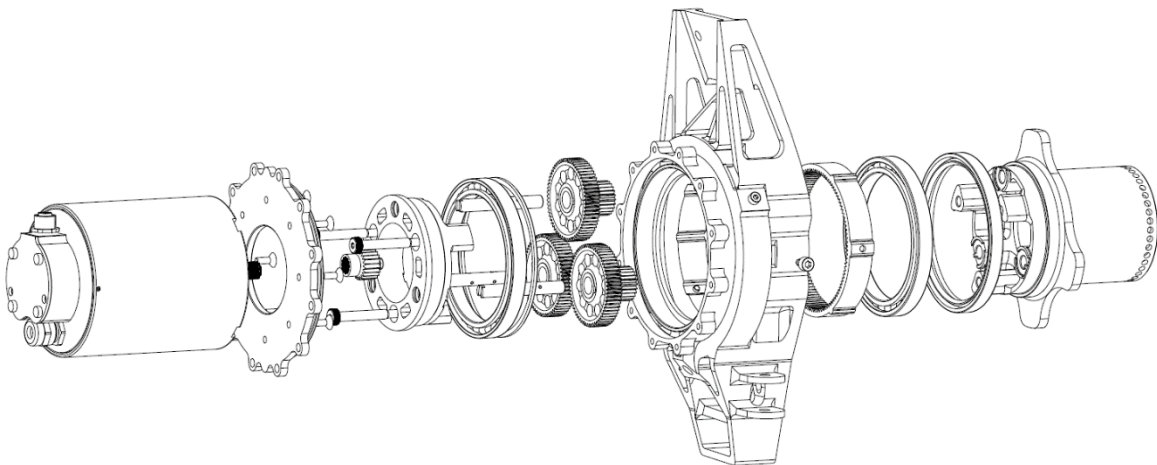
Exploded view of the complete in-wheel drive-train of the racing car 2018.
